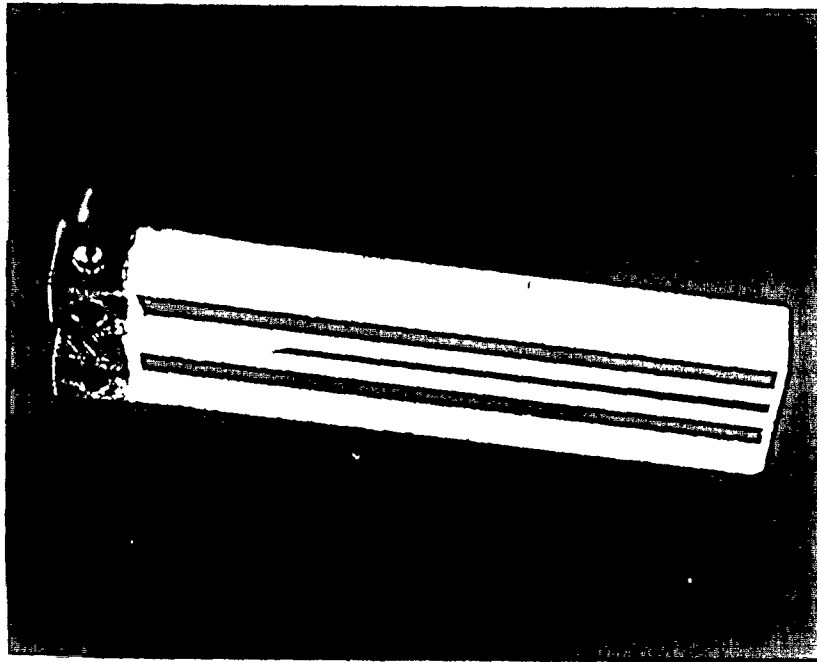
Machined Pyrex Sample with Steel Loading Tabs.
